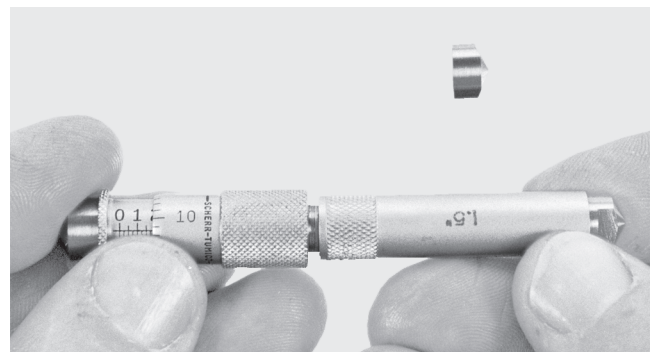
Attaching a 1.5-in. extension rod to an inside micrometer head.
